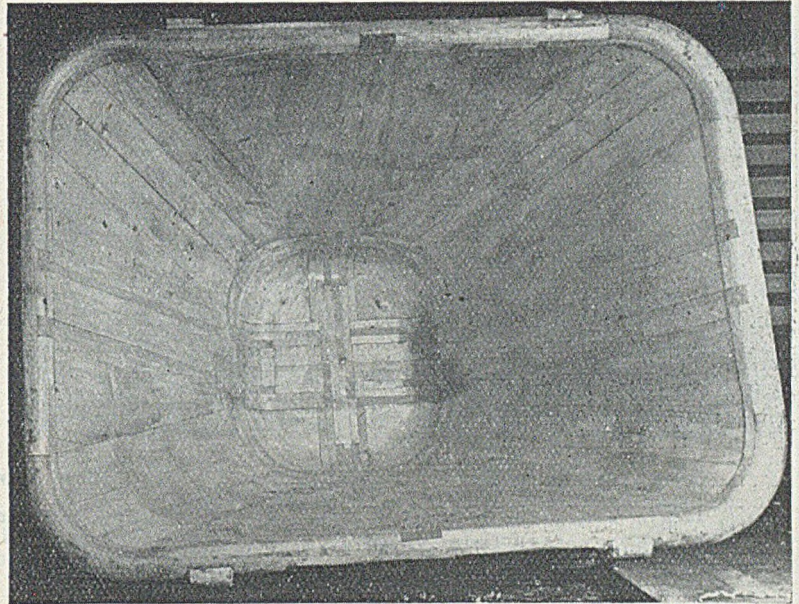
shows a pig mould pattern. It was one of these jobs which come along and call for a completely new layout before machine moulding could be used. Two pattern plates were made integrally with the pattern, the shape of the mould joint being reproduced on each half of the plates. Mild-steel plates were inserted on the joints to take the weight of the box part. Box parts were made specially to suit the shape of the board and pattern contours. The top-part board is the one to the left of the illustration. These castings were made in green-sand moulds.
